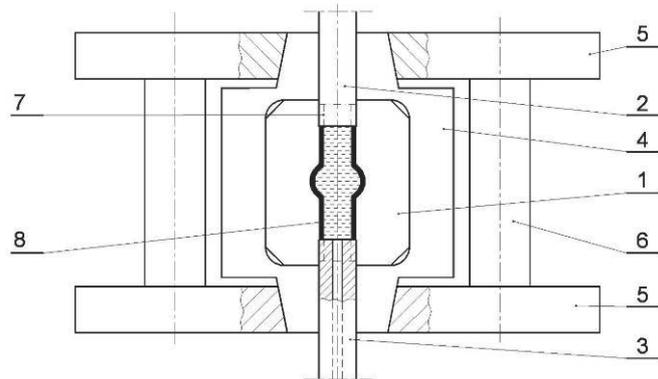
Diagram of the main part of the hydromechanical bulge forming tool, where: 1- die insert, 2- upper punch, 3- lower punch, 4- half-die, 5- pressure platens, 6- guide-posts, 7- tube segment, 8- hydromechanically bulged axisymmetric component
